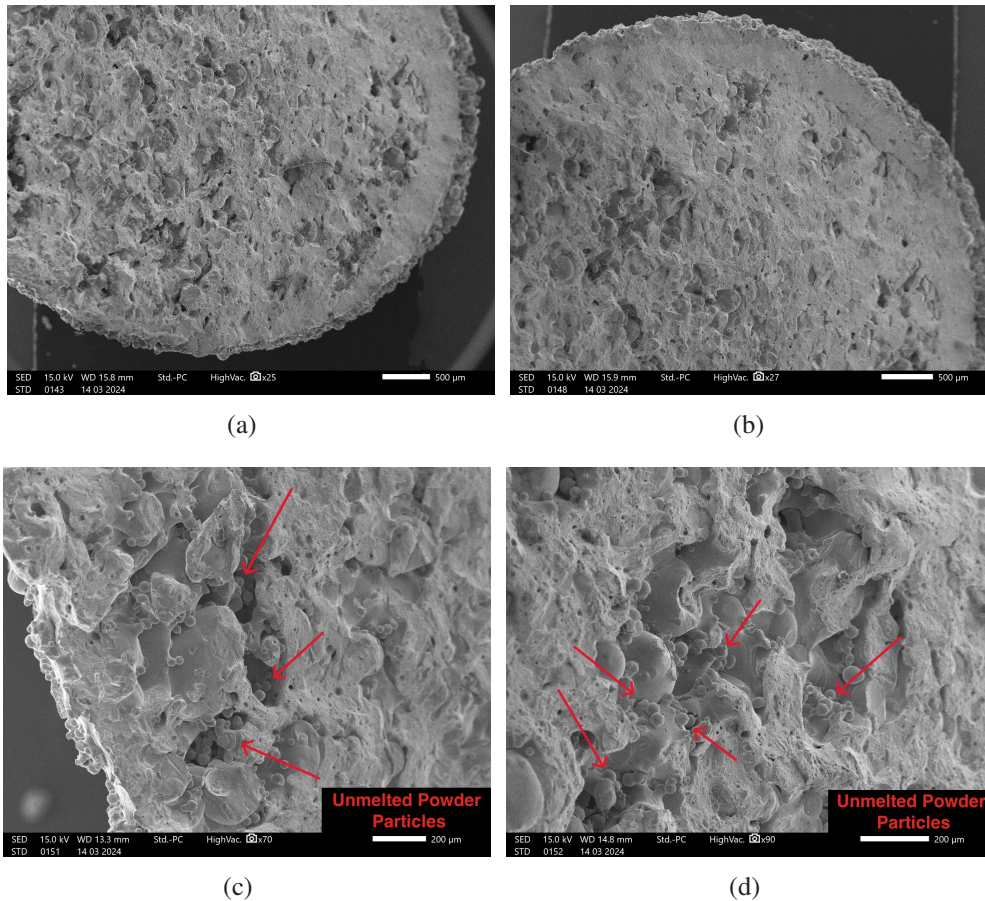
Fracture surface of specimen fabricated at 45° , premature failure: (a) and (b) low magnification view, (c) and (d) high magnification view, red arrows indicate unmelted powder particles
